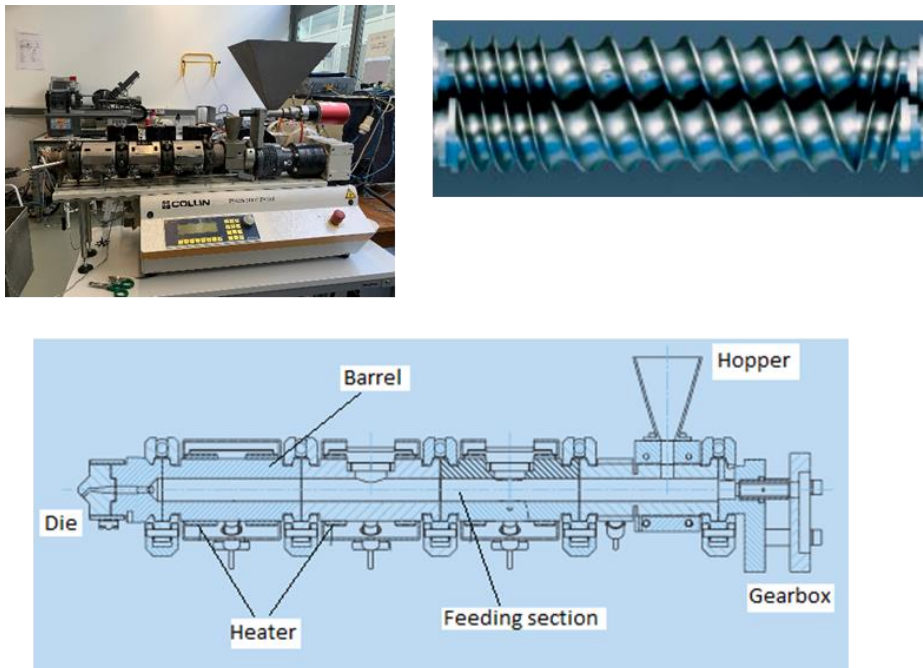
Images of the extruder ZK 25T Teachline from Dr. Collin, screws and schematic draw of the extruder elements.
